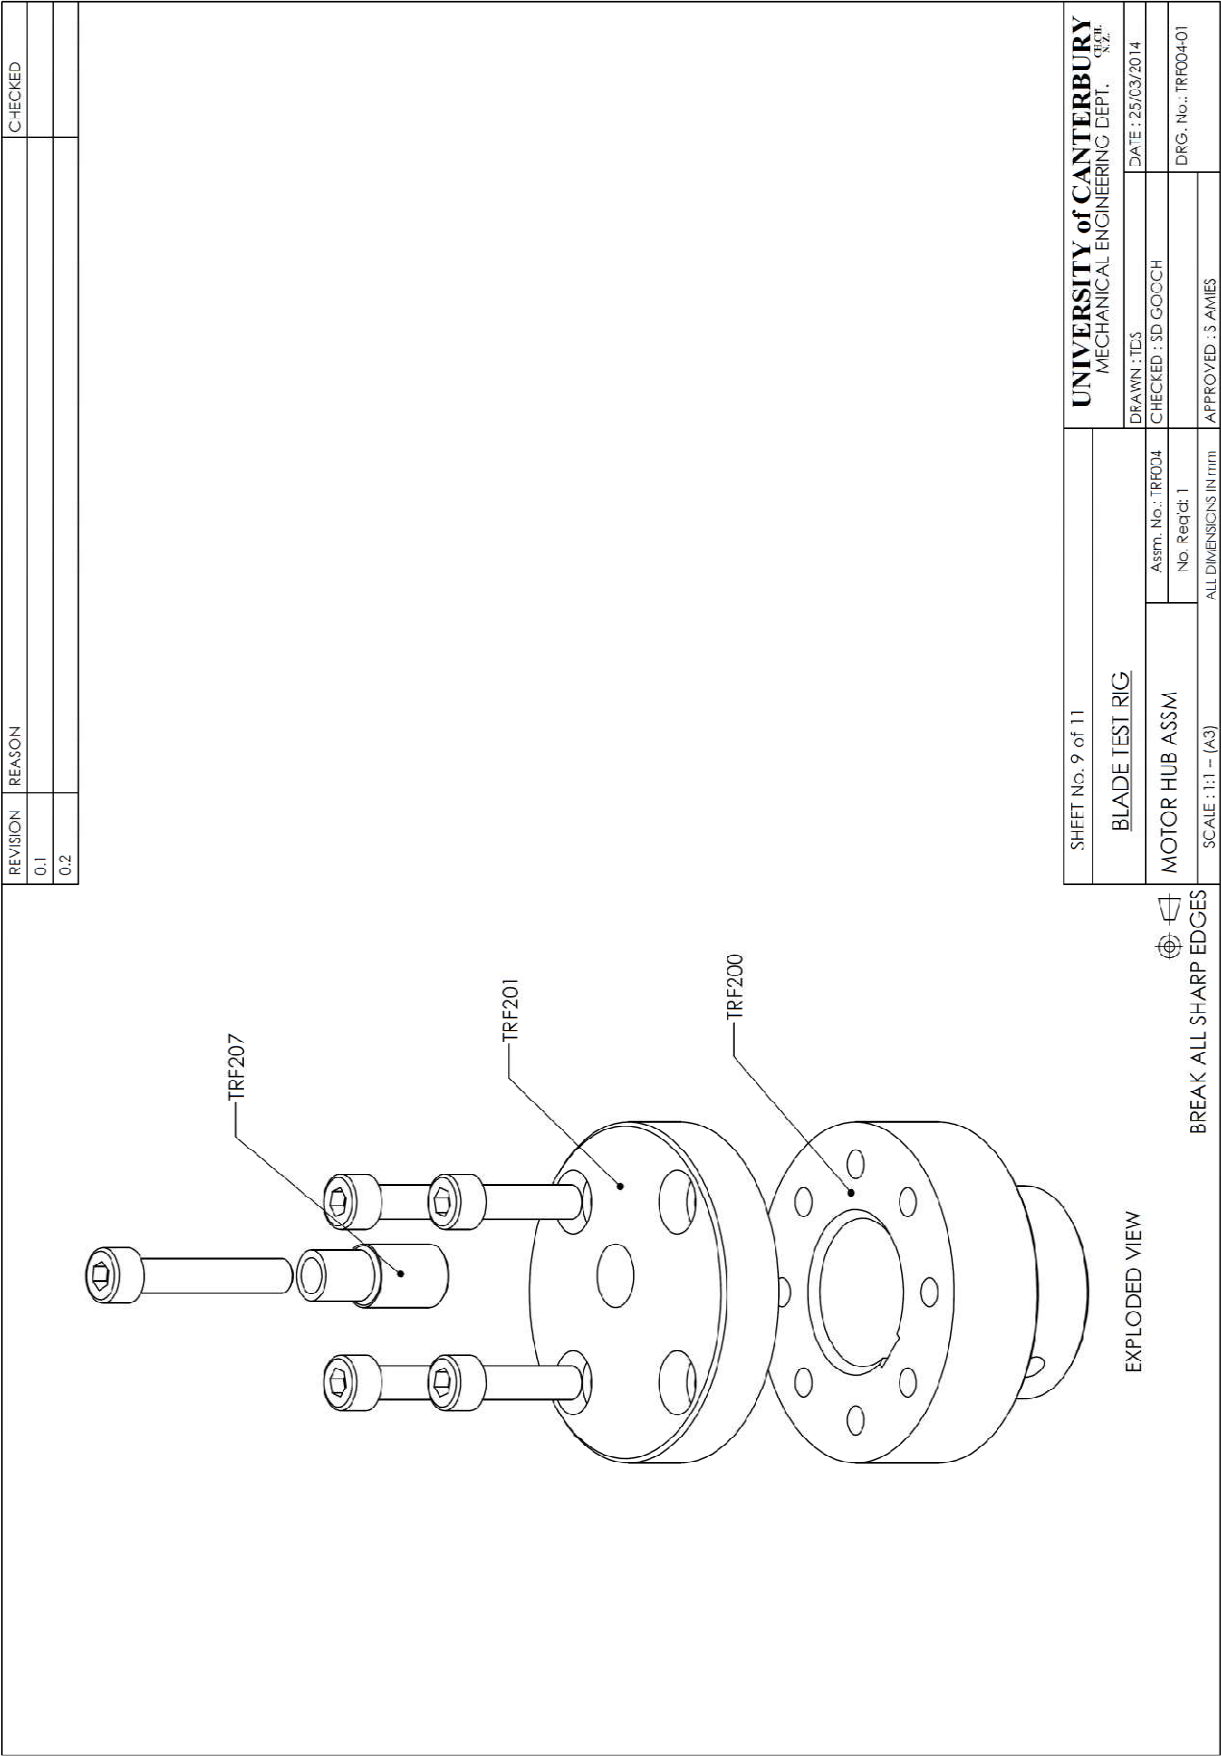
Exploded view of drive hub assembly in fatigue test rig.
